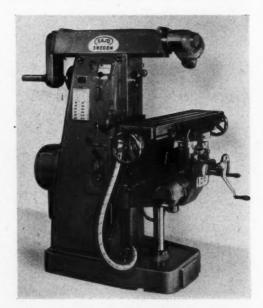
Drive to the vertical milling attachment on this Sajo type 52 Duo-Mill milling machine is taken from the horizontal cutter spindle through gearing and a shaft inside the overarm
